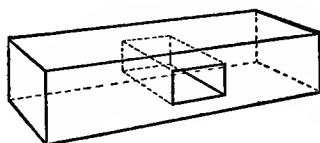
Perspective Drawing of Rectangular Block with a Rectangular Hole
